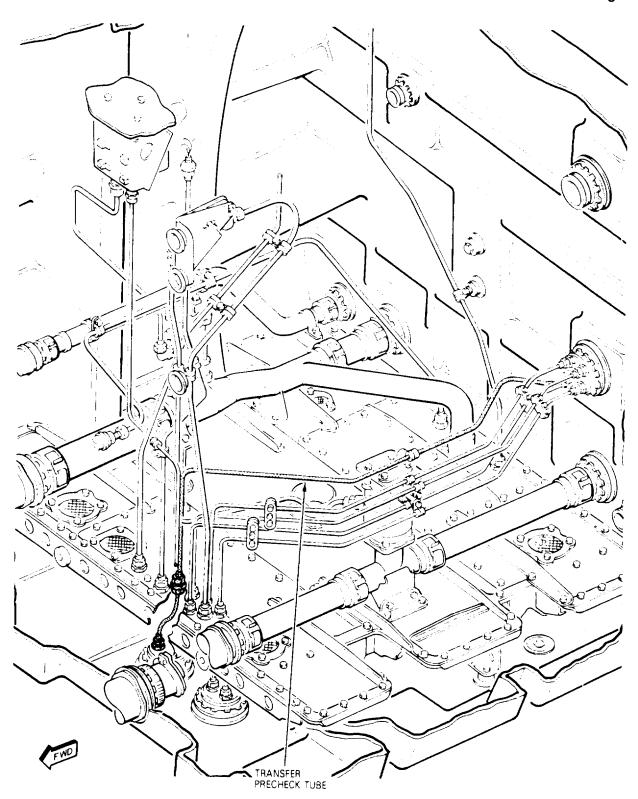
No. 4 Fuel Tank Transfer Test Component Locator (Sheet 1 of 2)
